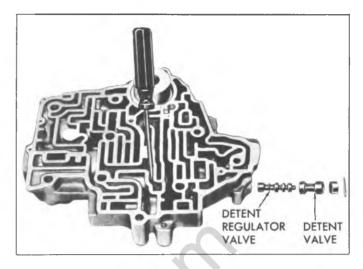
B—Installing Detent Regulator Valve and Detent Valve
